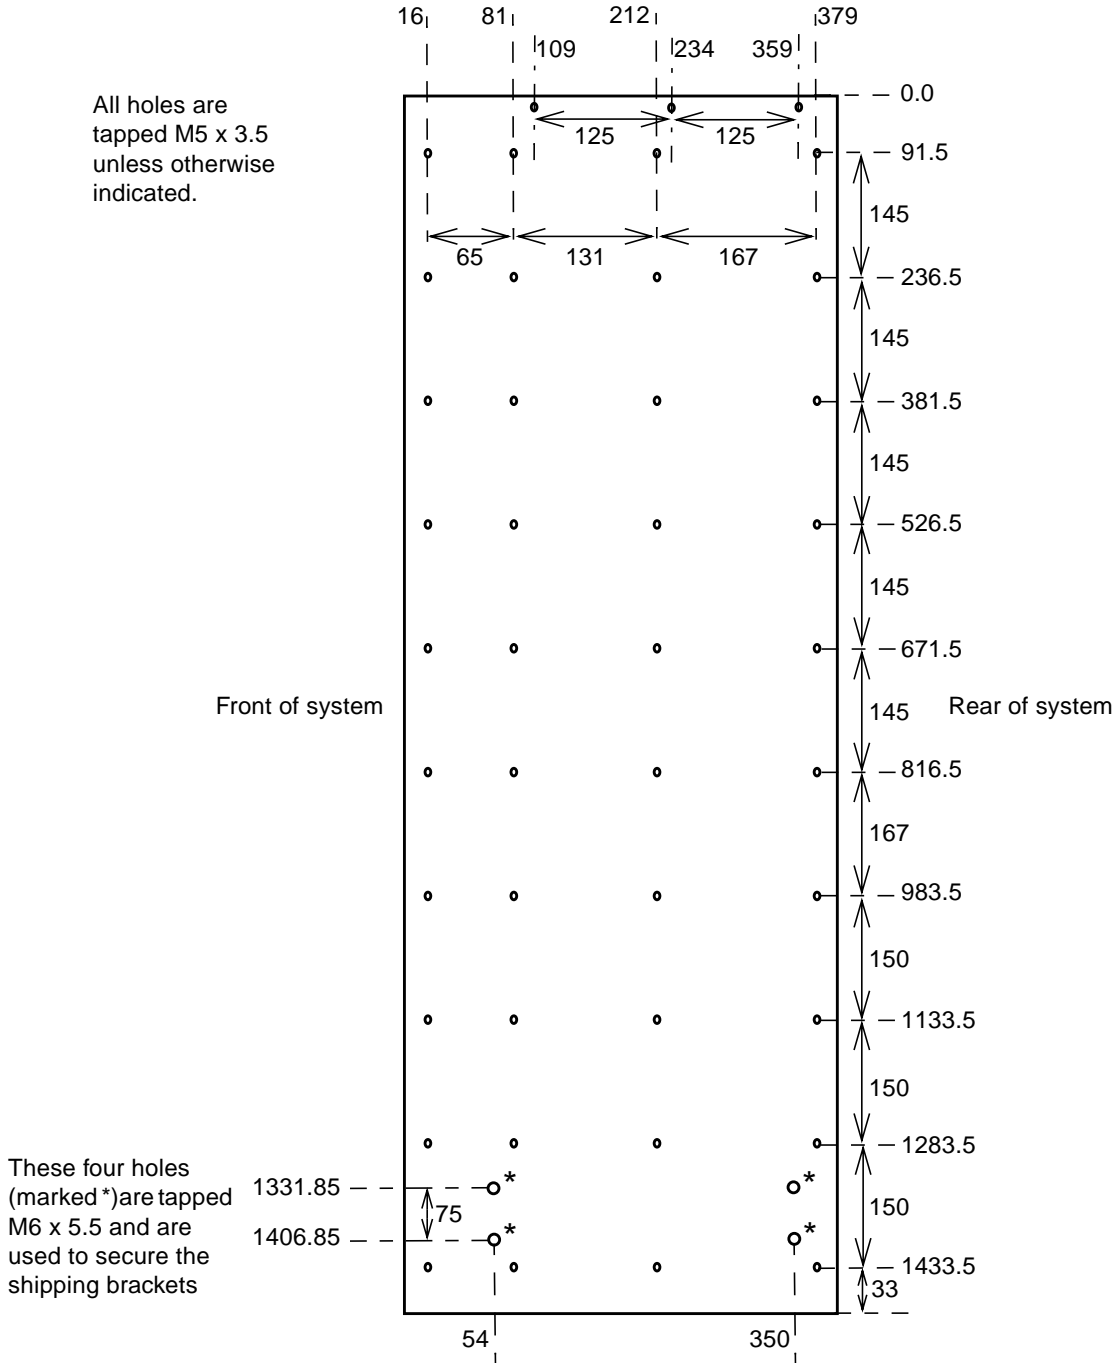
Chassis Mounting Hole Arrangement (all measurements in millimeters)
